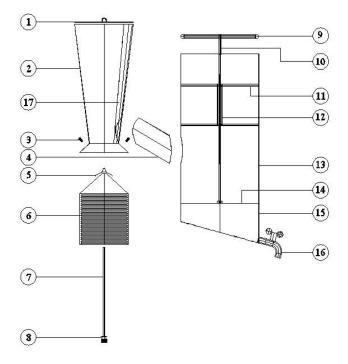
Exploded view of the Fabricated Pulper and Presser for Agbalumo
